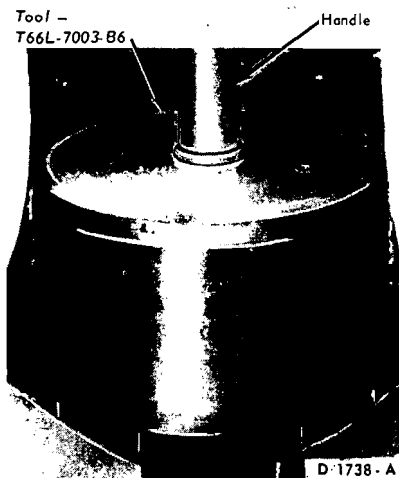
Installing Low and Reverse Brake Drum Bushing
